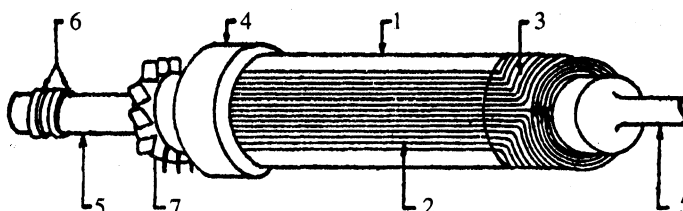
Turbogenerator rotor, 1–rotor body, 2–winding in slots, 3–rotor overhang, 4–retaining ring, 5–journal, 6–slip-rings, 7–blower.
